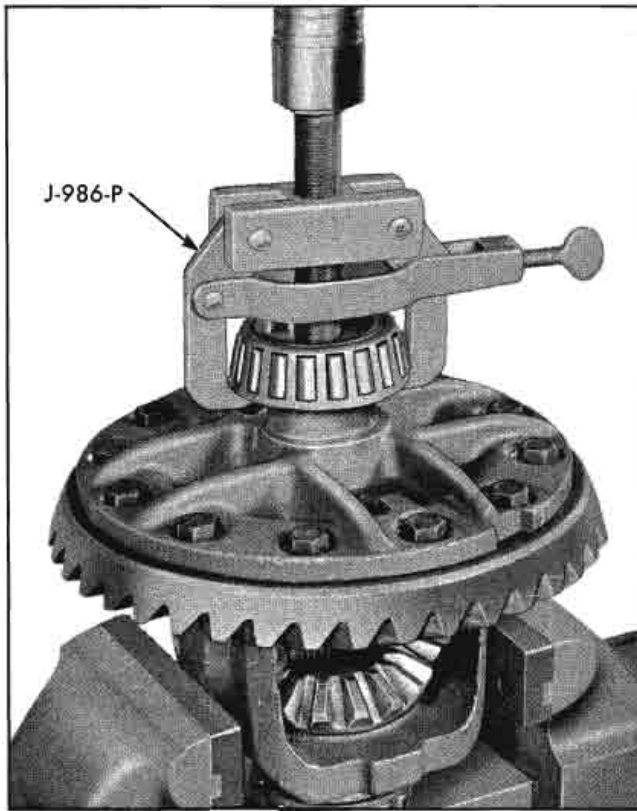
Removing Differential Case Side Bearing with J-986-P
